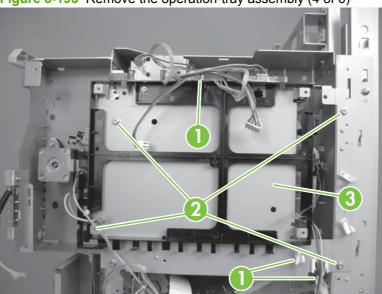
Remove the operation-tray assembly (4 of 6)
